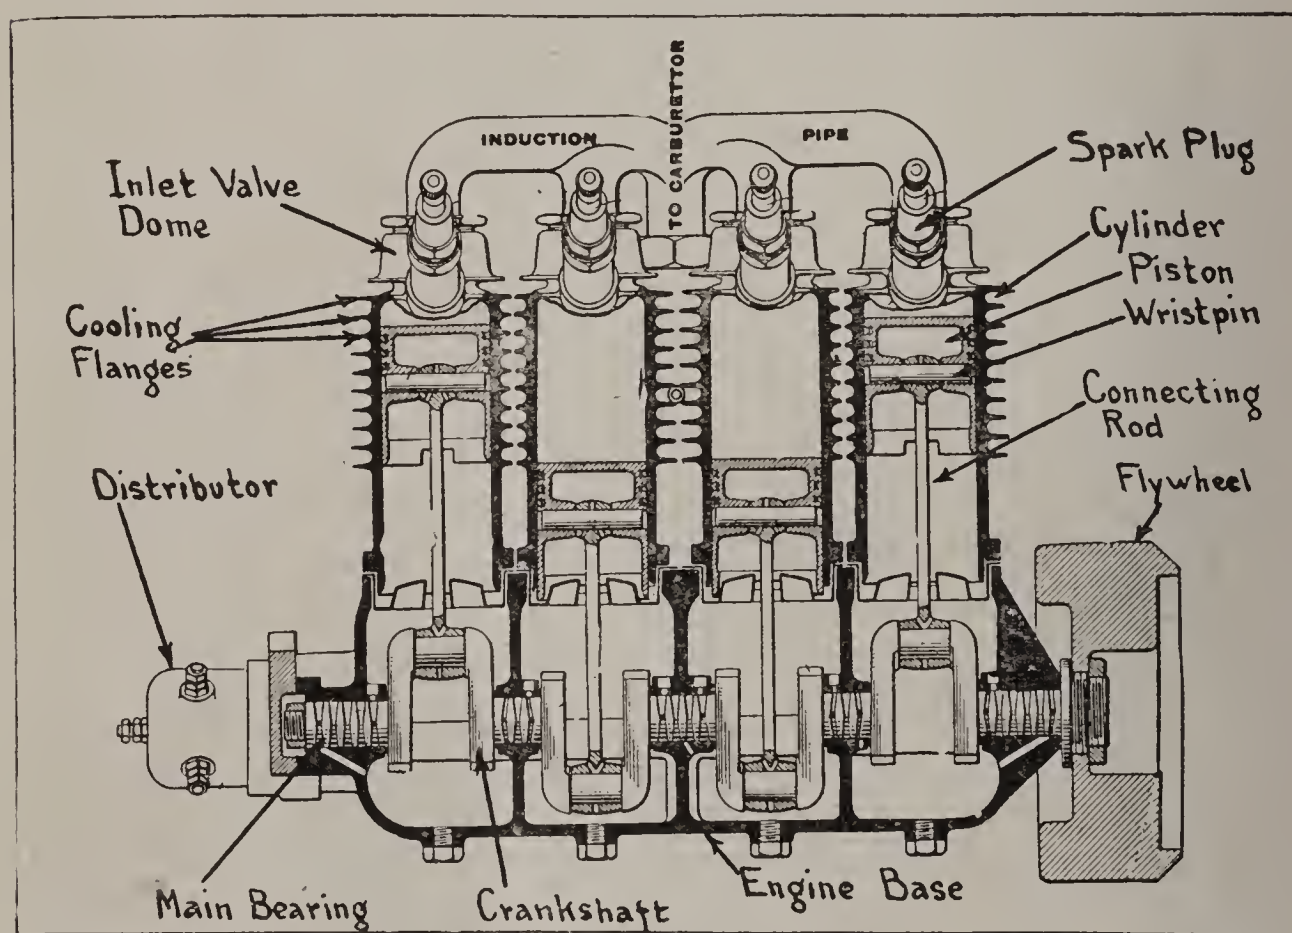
Sectional View of the F. N. Four Cylinder Motor.
